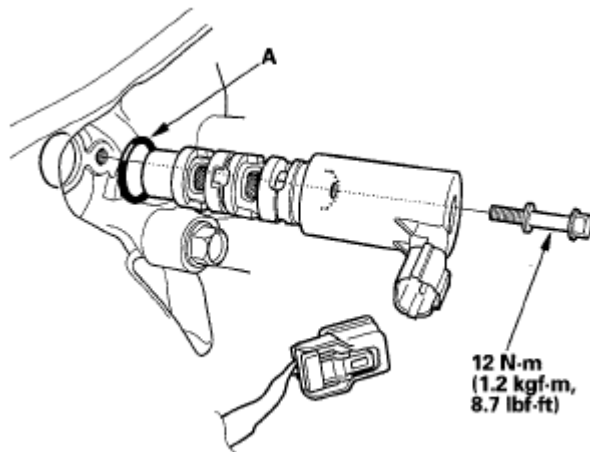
Identifying VTC Oil Control Solenoid Valve O-Ring With Torque Specification
